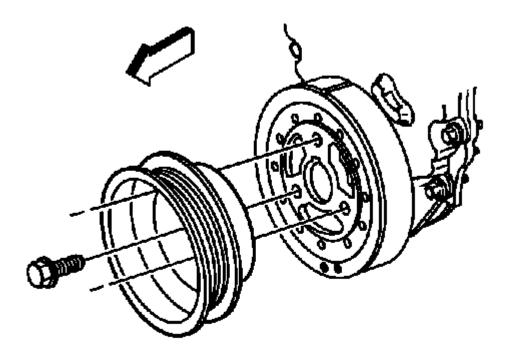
View Of Crankshaft Pulley & Bolts Courtesy of GENERAL MOTORS CORP.
